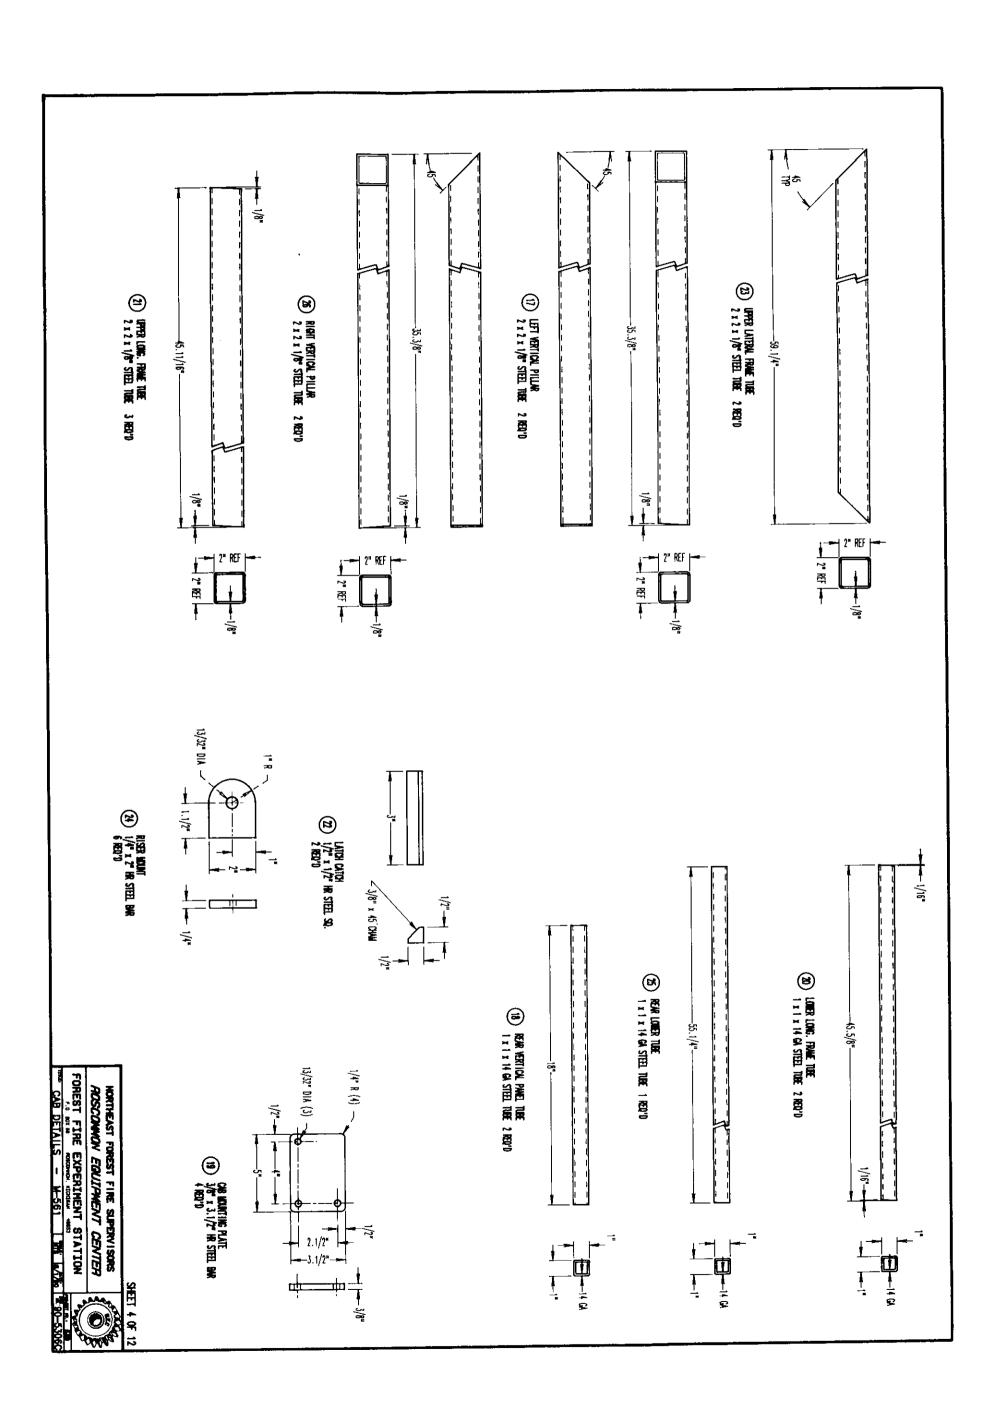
, REC's M-715 slip-on tank design (Project #33) can be modified for the M-561 by removing 4 inches from the front of the tank assembly
